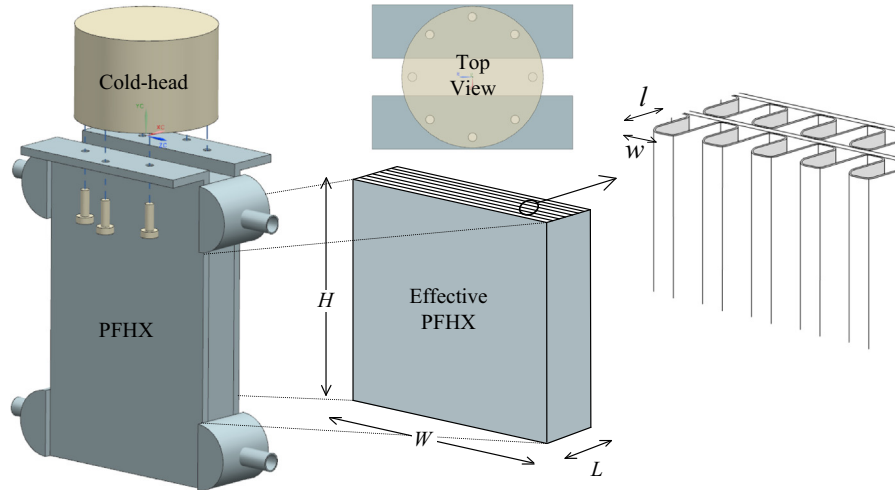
Graphical representation of design concept for PFHX assembly with cold-head and geometric notation for dimension of PFHX and fins.
